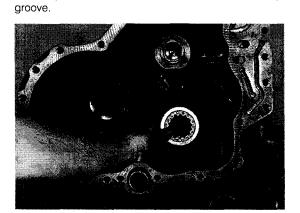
Install high and 3rd clutch shaft rear bearing outer race.
